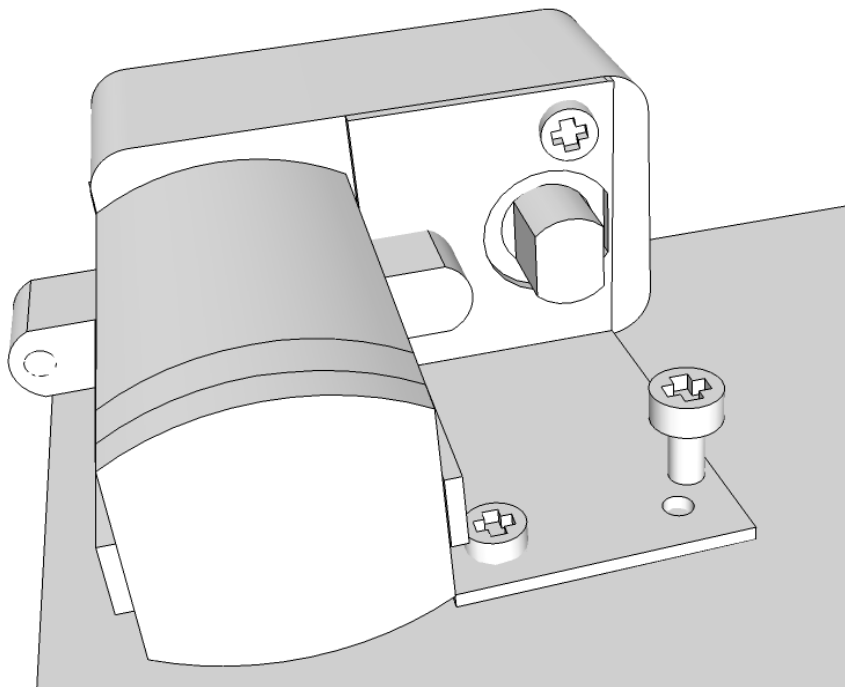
Fastening GM8 Motors to the Bottom Chassis
